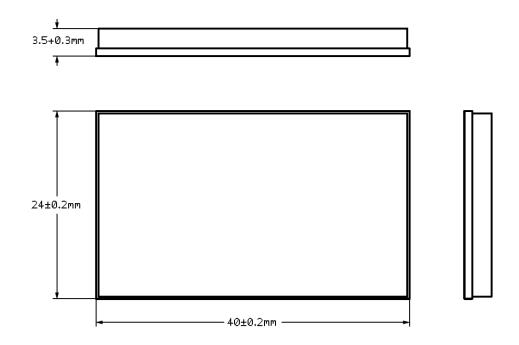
Dimension of swarm bee LE V2 module, top view and side view
